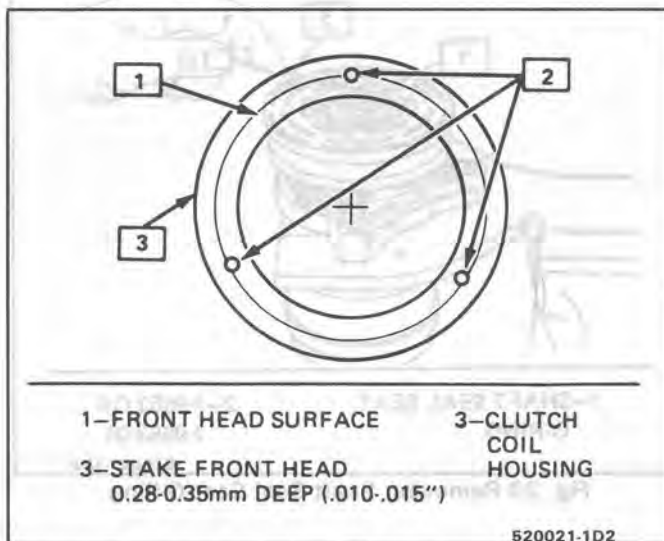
Details of Stakes In Front Head for Clutch Coil
